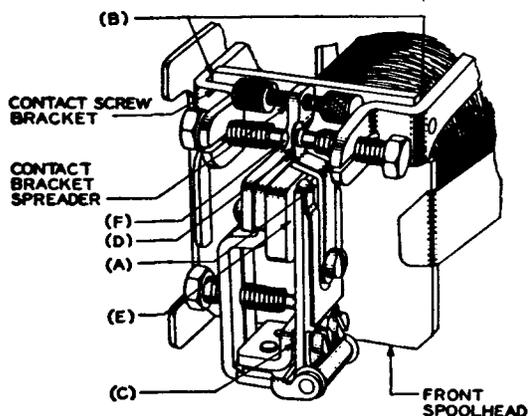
Relay Equipped With Contact Bracket Spreader
